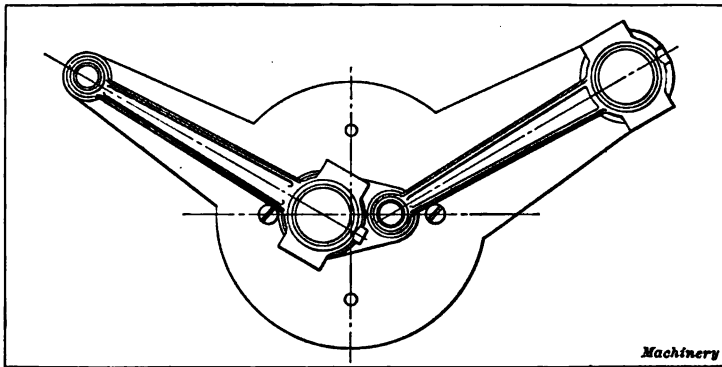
Engine Connecting-rods, and Fixture Used when Broaching
